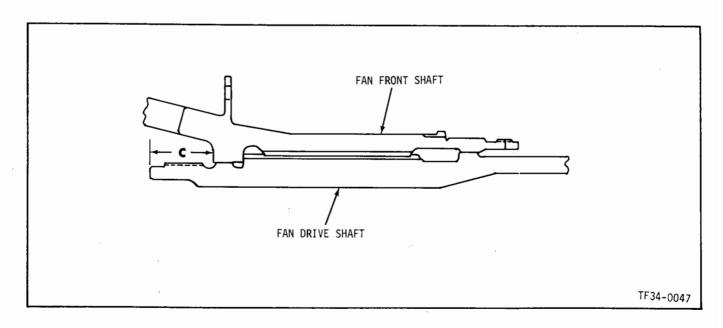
Fan Front Shaft Seating Dimensions - After Installation
